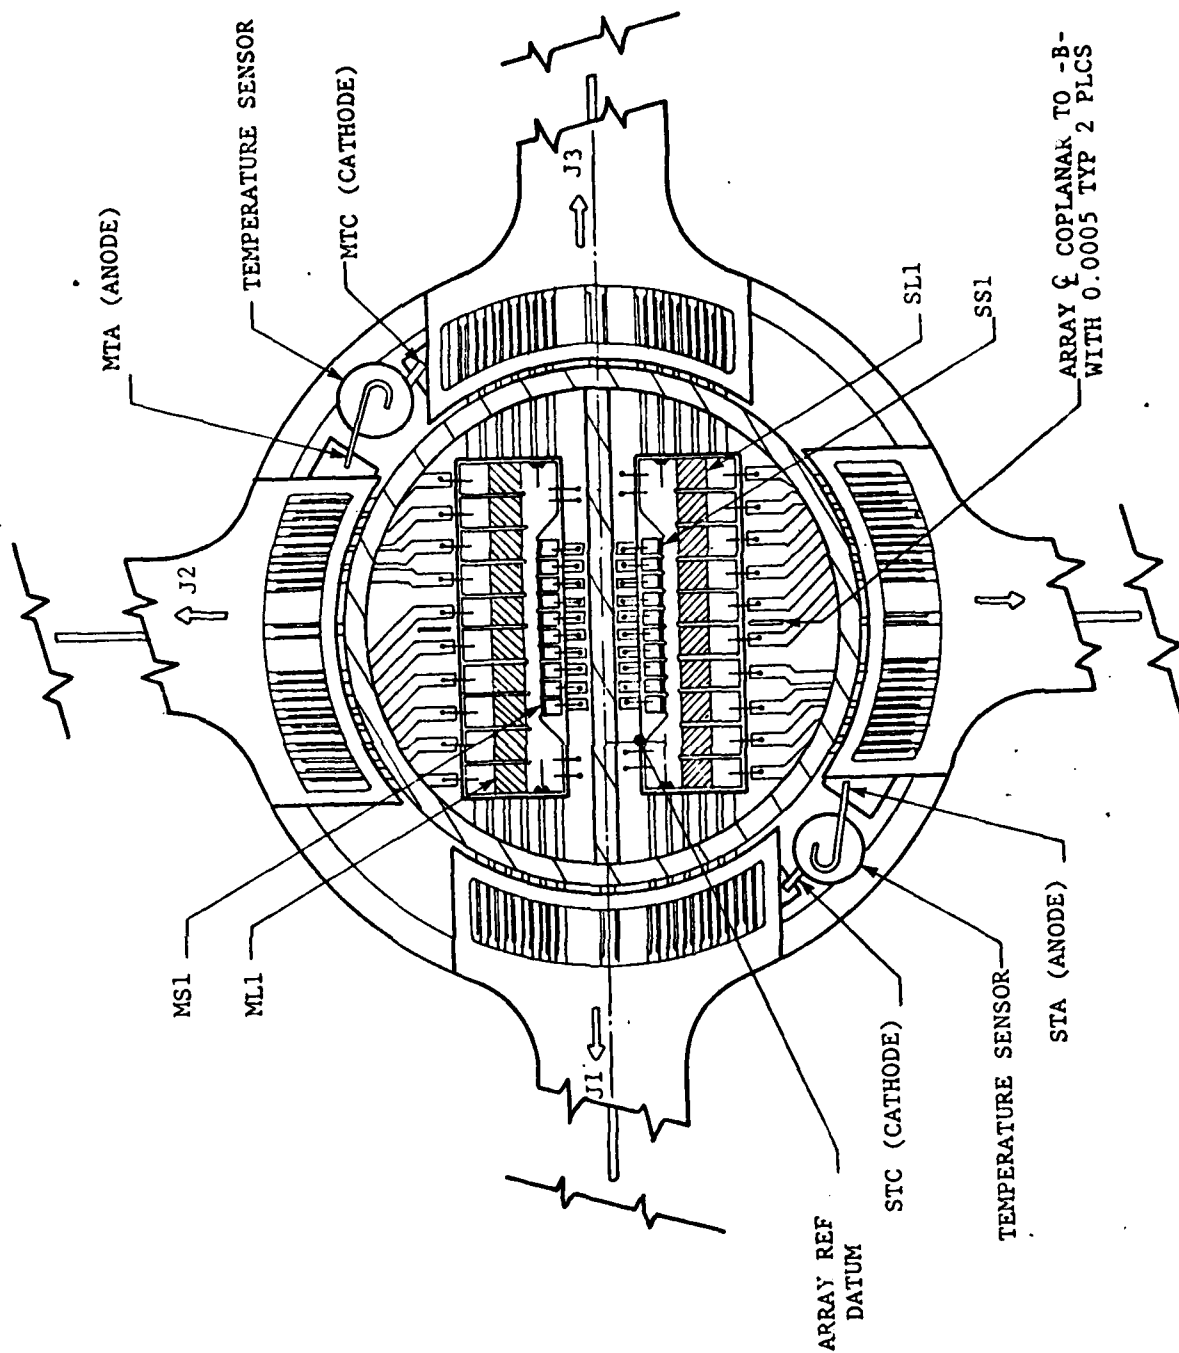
DETECTOR PLATE ASSEMBLY CLOSEUP
